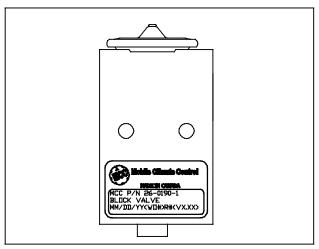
Thermostatic Expansion Valve (Block Valve)
